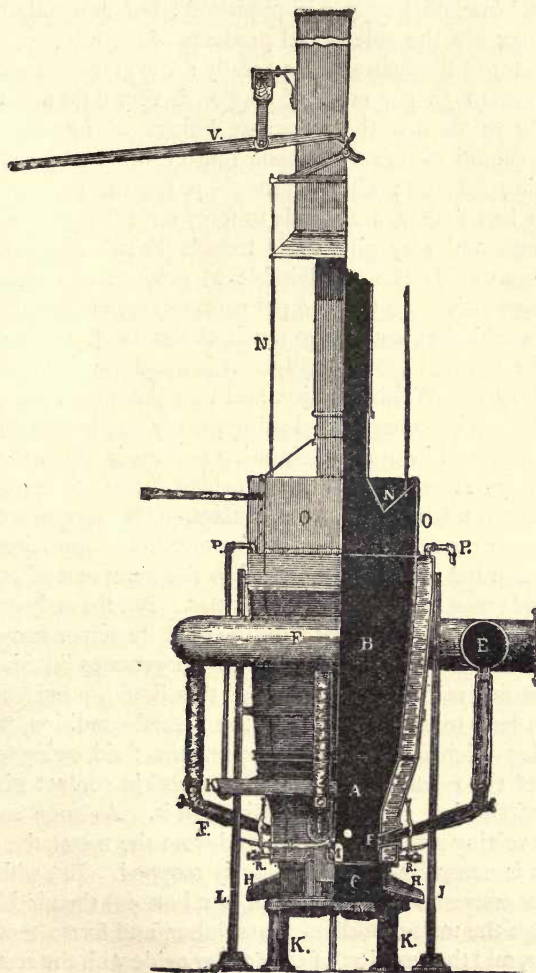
Water-jacketed Rachtette furnace for copper-smelting (end view, part elevation, part section).
